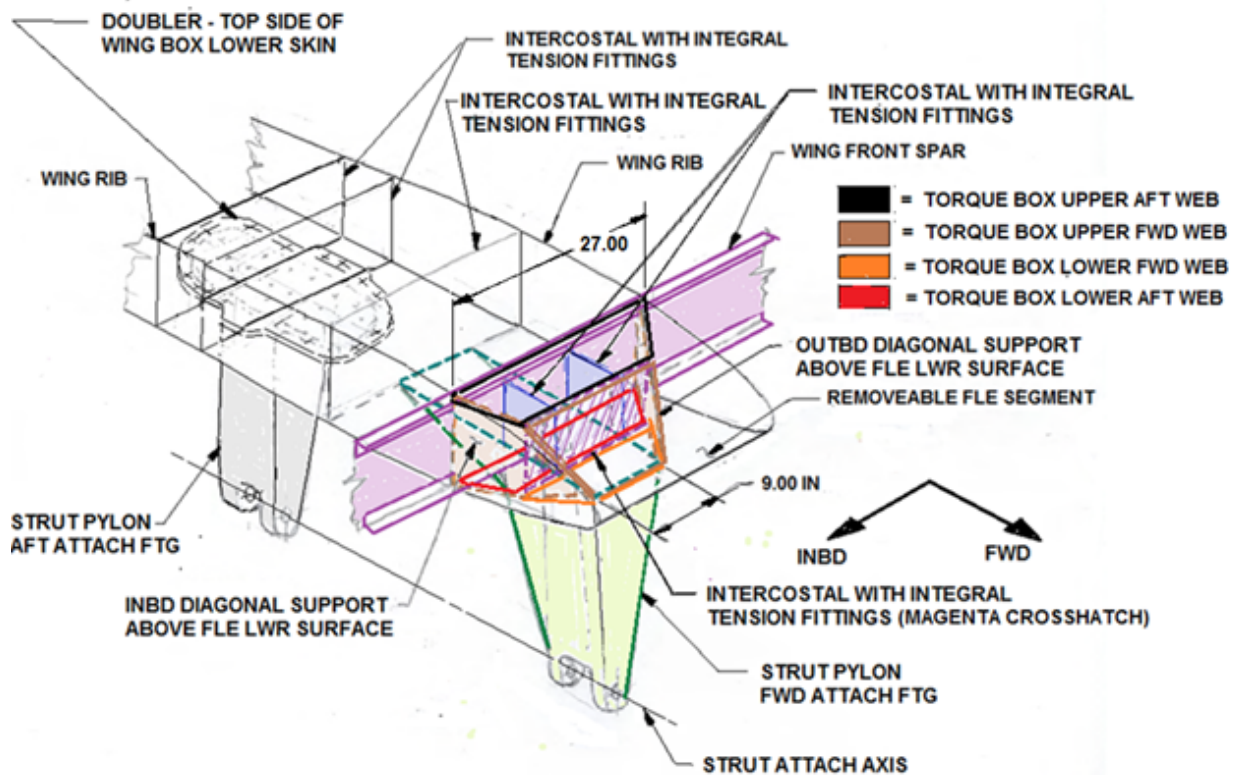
Main strut outboard attachment structural arrangement overview.
